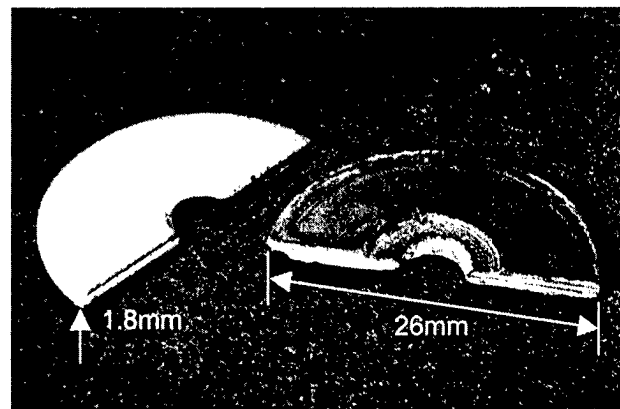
A pair of center seals will form a complete center seal. Left one shows bottom, right one shows top surface. The bottom surface gives $0.5 \mu\text{m}$ RMS roughness.
